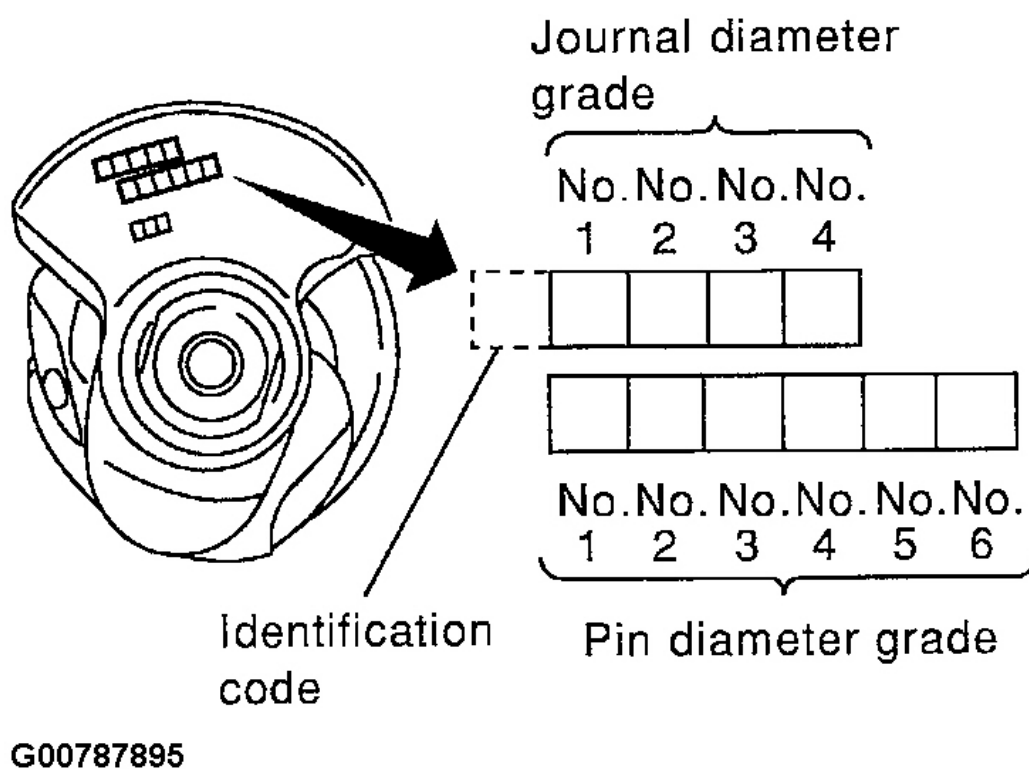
Identifying Crankshaft Journal Diameters Grade Number
